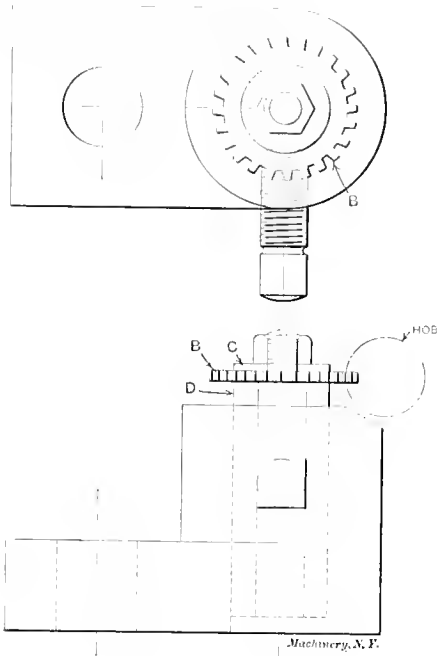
Fixture for Hobbing Small Worm Wheels in the Lathe
